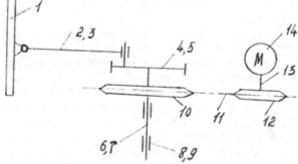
Schematic diagram of a vibrator of cotton bushes with a drive: 1- working body; 2, 3-rods; 4, 3-gear wheels; 6,7-ball bearings; 8, 9-axis; 10-sprocket sprocket; 11- chain; 12-lead sprocket, 13-shaft, 14-motor
